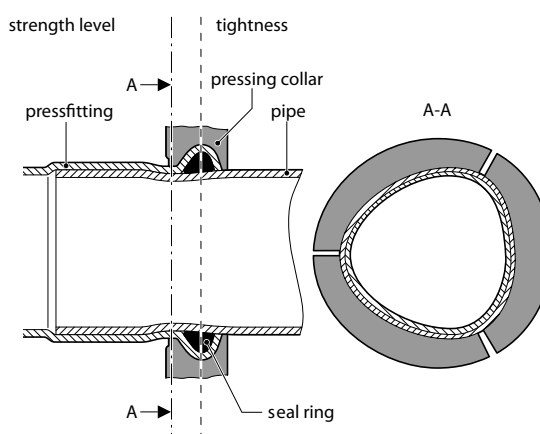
Section through a pressfitting joint with the pressing collar (lemon shaped pressing contour) still in position.
